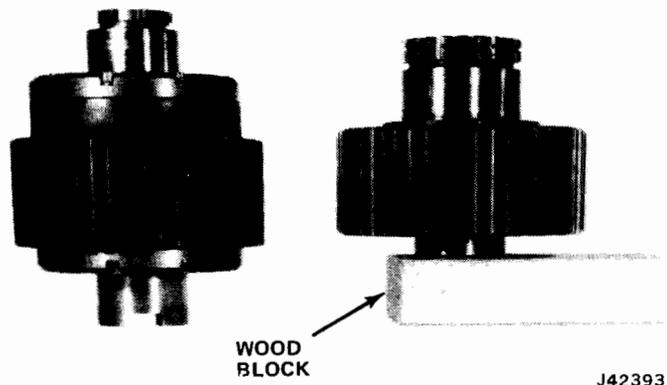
Differential and Drive Sprocket Positioned for Chain Installation
